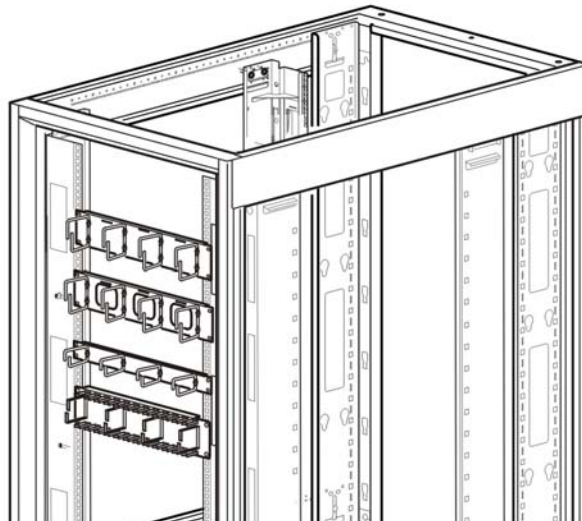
AR7707 large cable rings with AR8442 mounted in front of a wide enclosure
